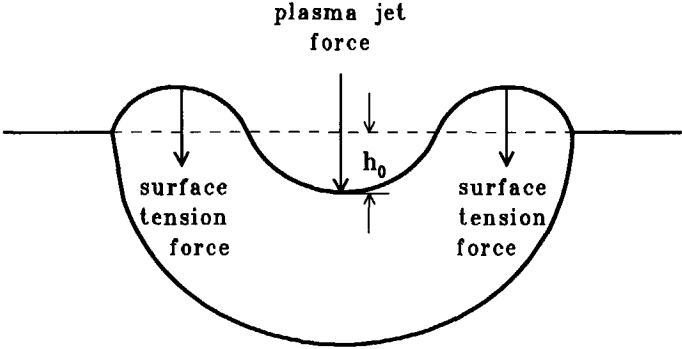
Illustration of pressure balance on the weld pool surface.
